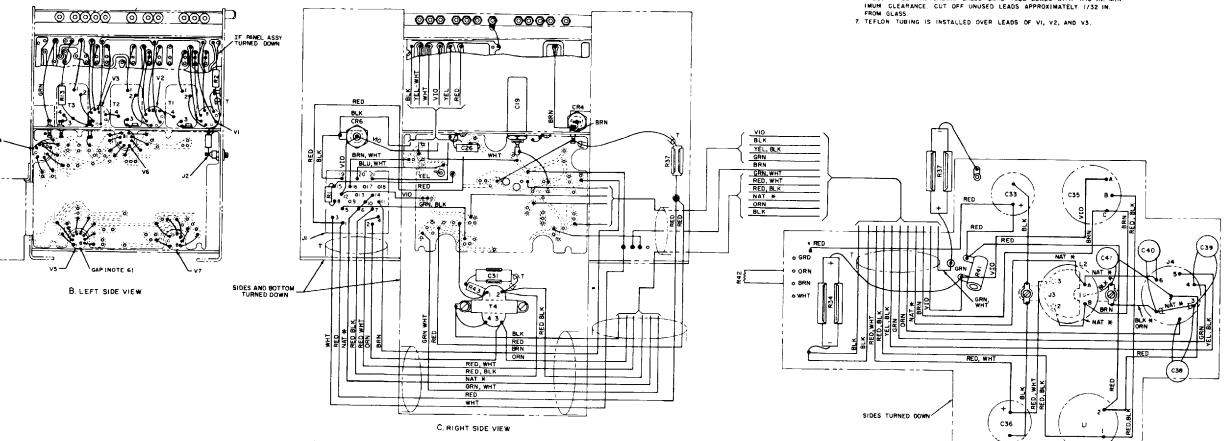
Receiver, Radio R-1021/ARN-30D, vf./af assembly, A2, wiring diagram.
